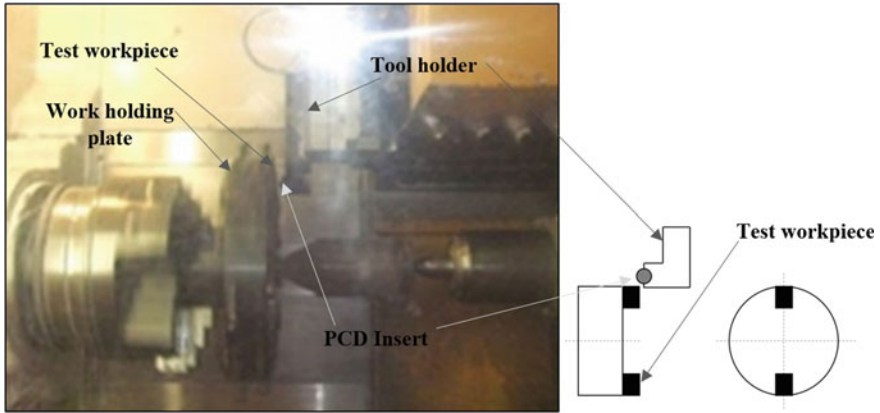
Accelerated cutting tool testing employed by the cutting tool manufacturers
